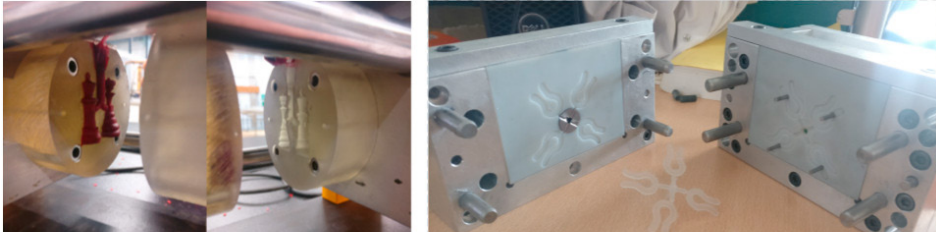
(a) Setup of Revision 2 of the Chess Piece experiment. (b) Assembly of the MUD box with inserts and component produced.
